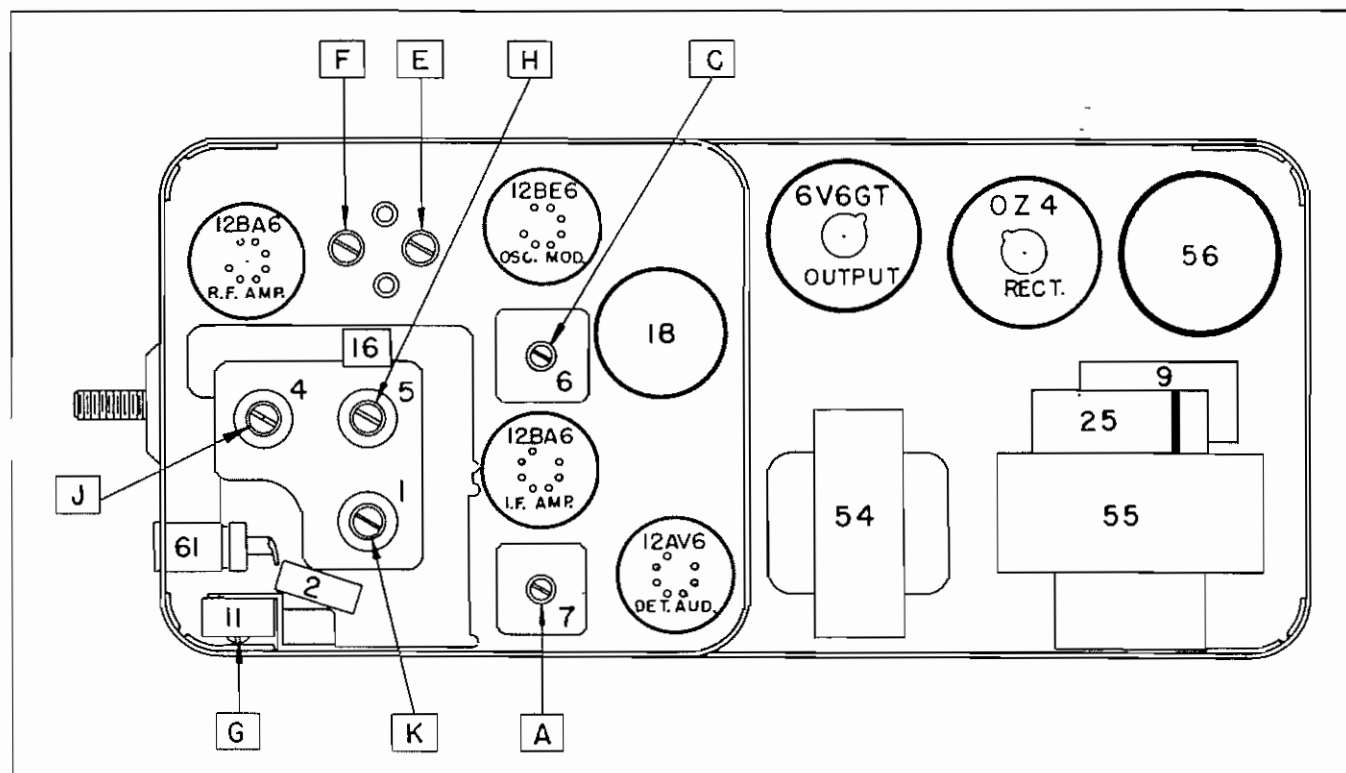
PARTS LAYOUT - TOP VIEW - 987187 - RADIO
